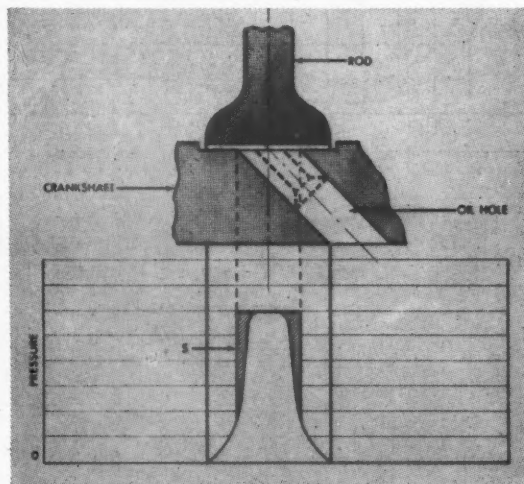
Modern practice of drilling an angular hole from the main bearing to feed the rod bearing
